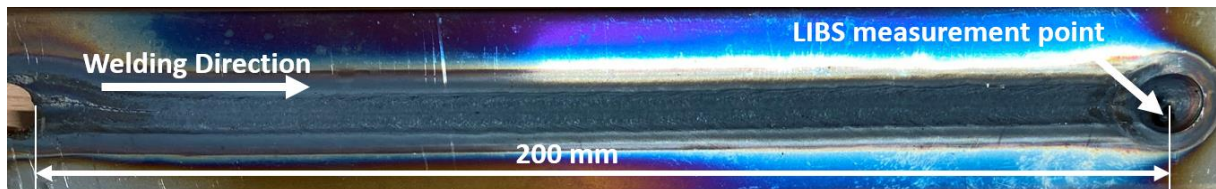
Finished weld seam of the Sample 4, LIBS measurement spot on the weld end crater is marked.
